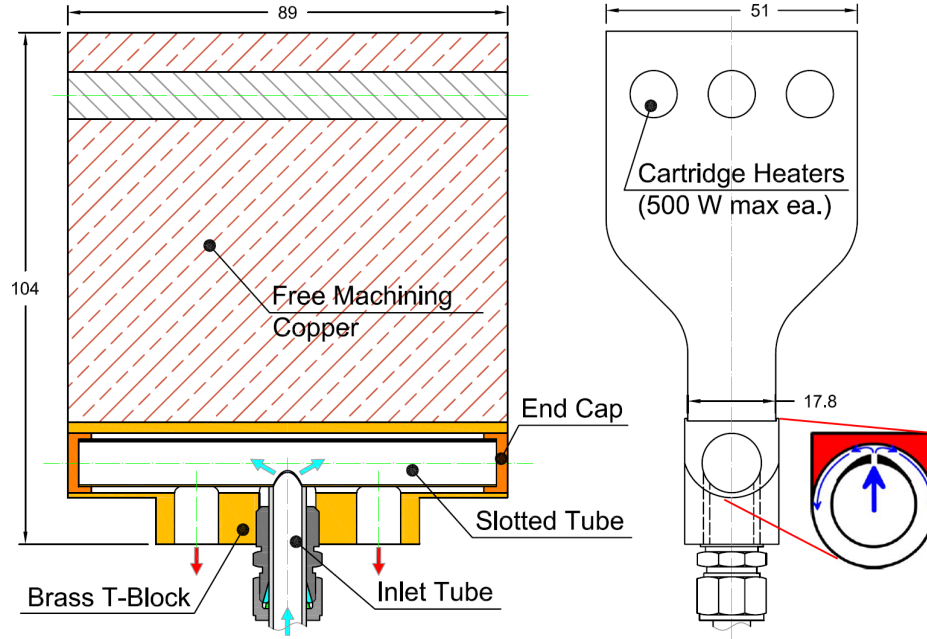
Cross-section (left) and side view (right) of the single-sided heated T-tube experimental apparatus. Shown dimensions are in mm.
